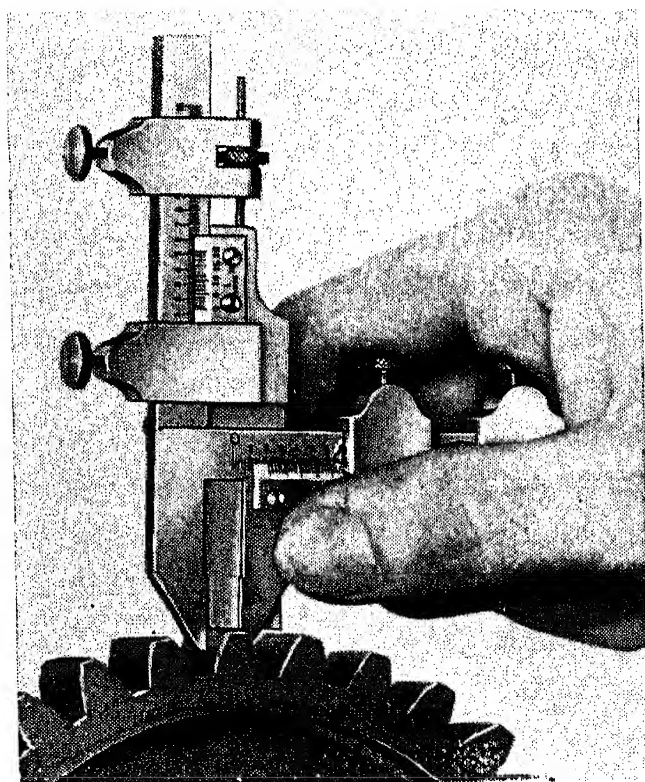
An application of a gear tooth vernier caliper. (Courtesy Brown and Sharpe Mfg. Co.)
